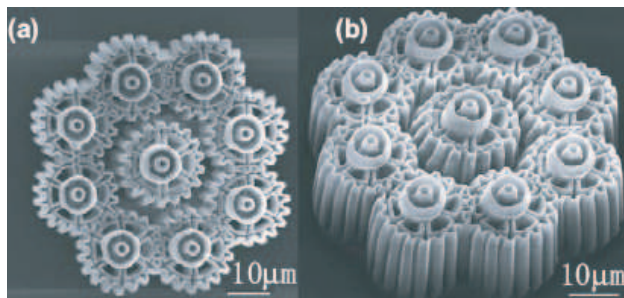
Top (a) and side (b) views of assembled microgears set fabricated by MBTPP.
